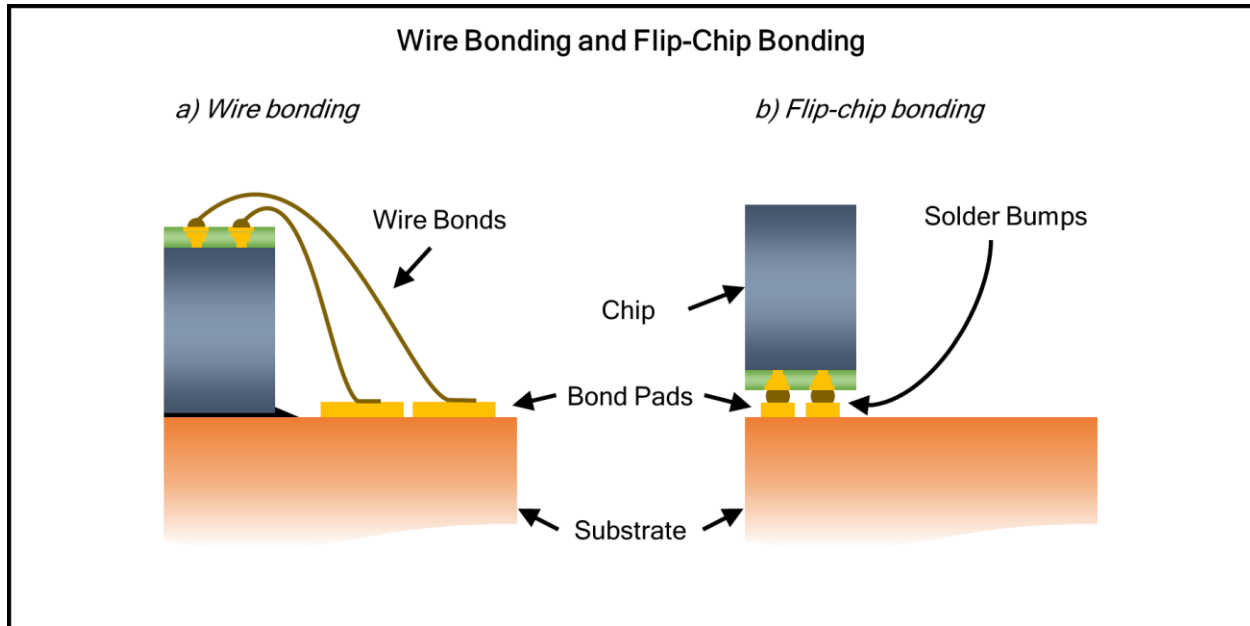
The two electronic packing techniques: (a) Wire bonding and (b) Flip-chip bonding.
